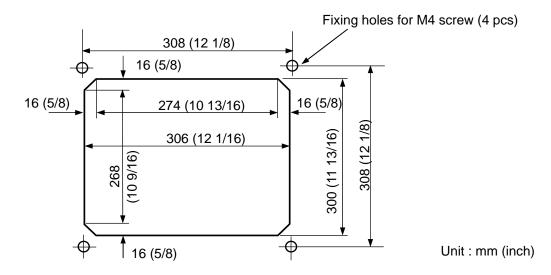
Dimensions of opening and fixing holes for GTD-110
